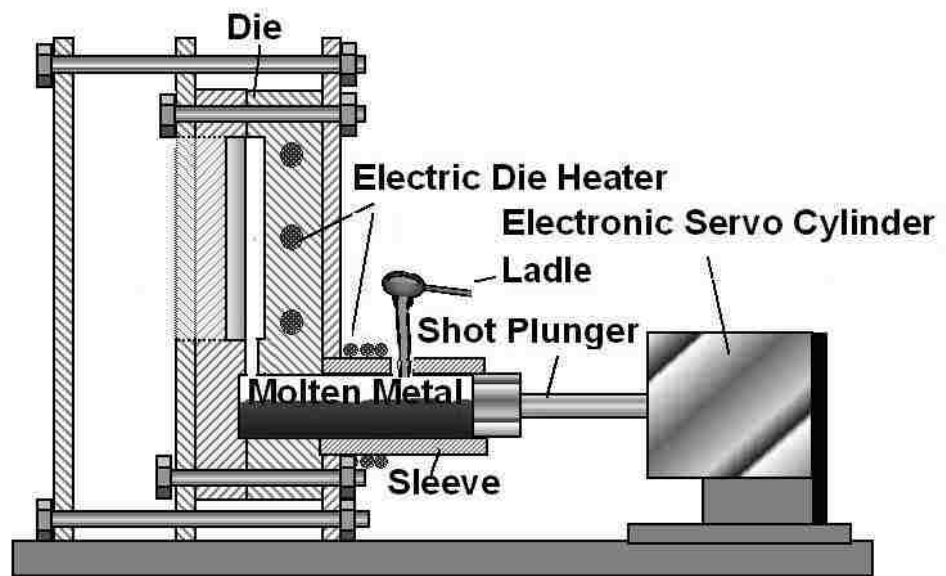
Schematic diagram of cold chamber die casting machine [10].
